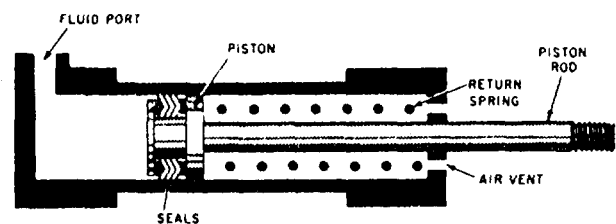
Single-acting, spring-loaded, piston-type actuating cylinder.
